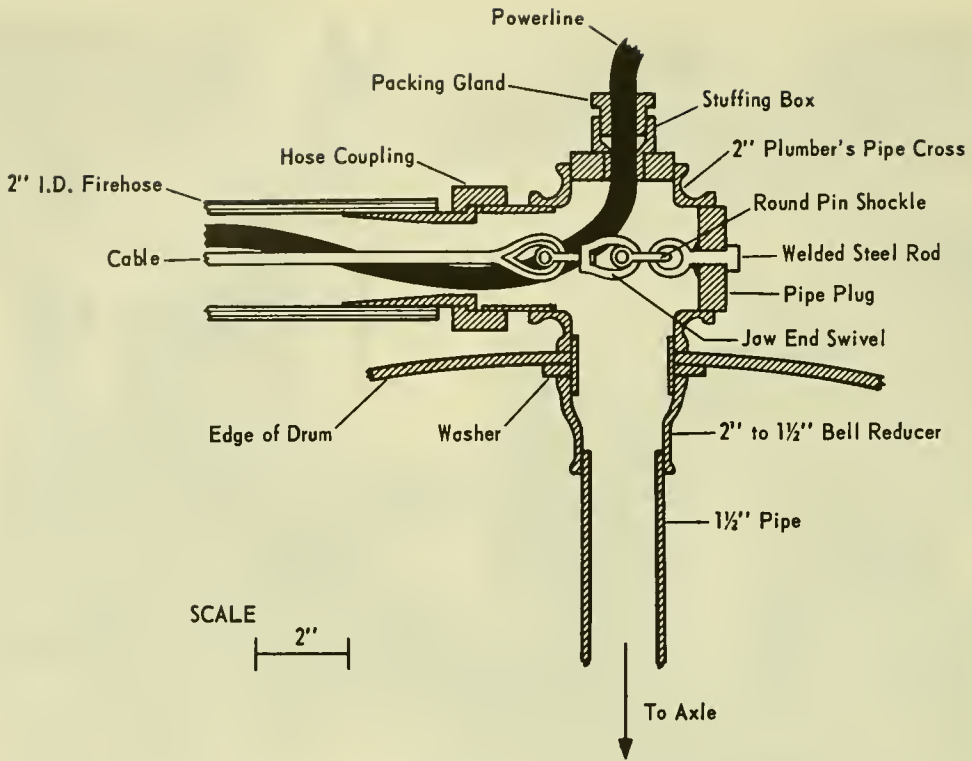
Schematic drawing of the upper hose-cable terminal assembly mounted near one edge of the winch drum.
